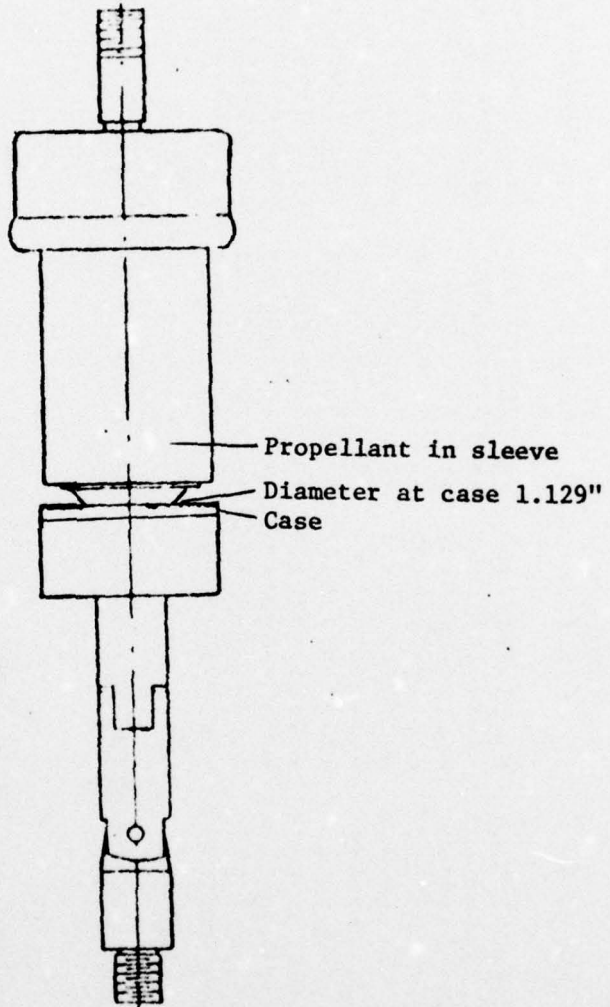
Sleeved Bond Specimen (for Bond Tensile Test)
